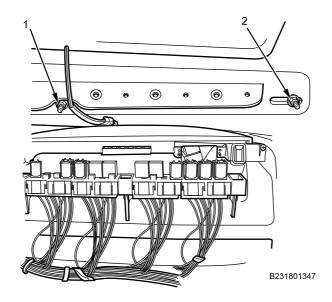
Cross-Vehicle Equipment Bracket Nut Right Side Interior Locations.
